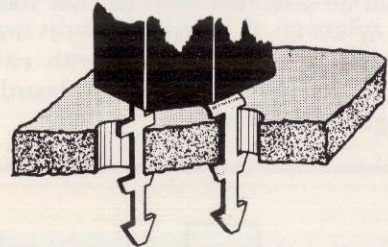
Light perpendicular pressure will now ensure that the projections pass right through the holes so that the tags snap into the locked position.
